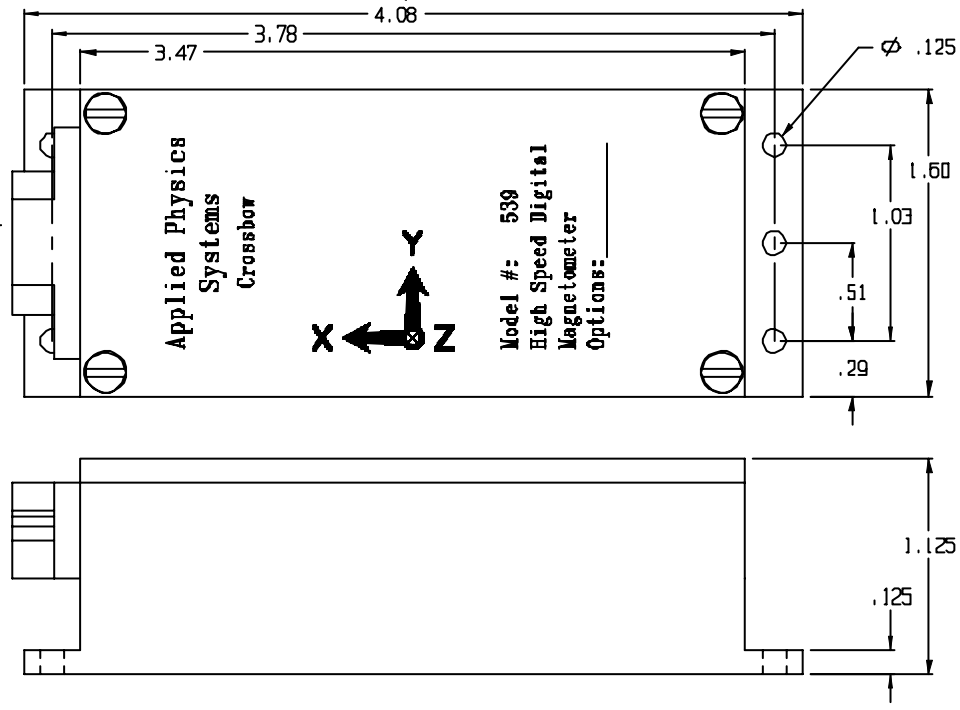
MODEL 539 HIGH-SPEED DIGITAL 3 AXIS FLUXGATE MAGNETOMETER (DIMENSIONS ARE IN INCHES)
